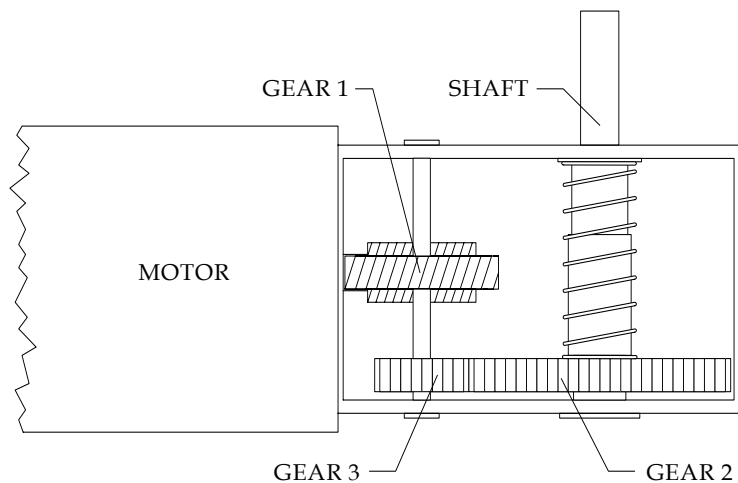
Gear Box Modified by Changing Gears 2 and 3.
